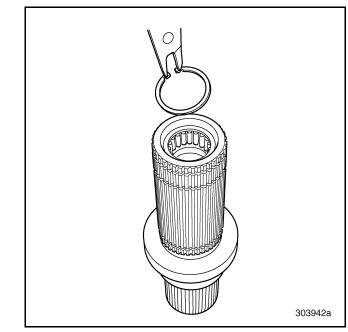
Removing Spigot Bearing Snap Ring (T313L/T318L Shown)
